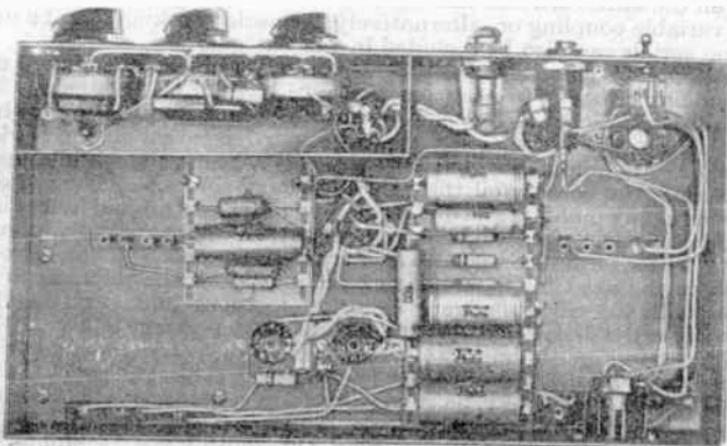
THE UNIT SHOWN IN FIG. 9 BEFORE PRINTED-CIRCUIT TECHNIQUES WERE INTRODUCED.
